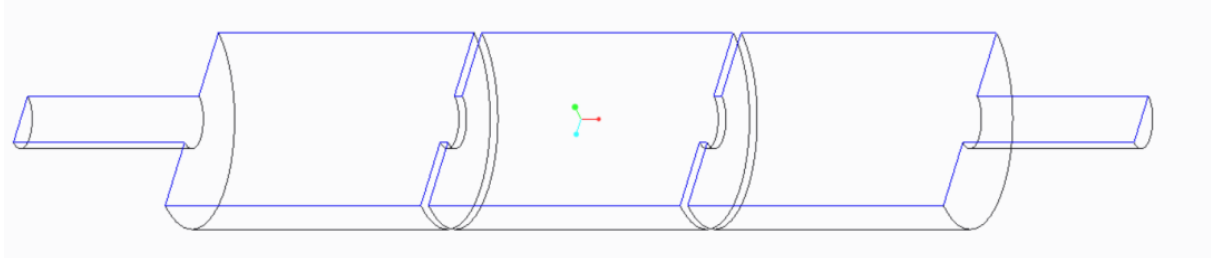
Half Sectional View of Single Expansion chamber with Two Baffle Plates
